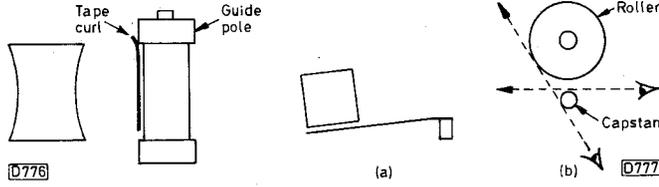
(left): A concave pinch roller results in uneven pressure on the tape, which will slip up or down on the exit guide pole. It's best to check the pinch roller by removing it.
